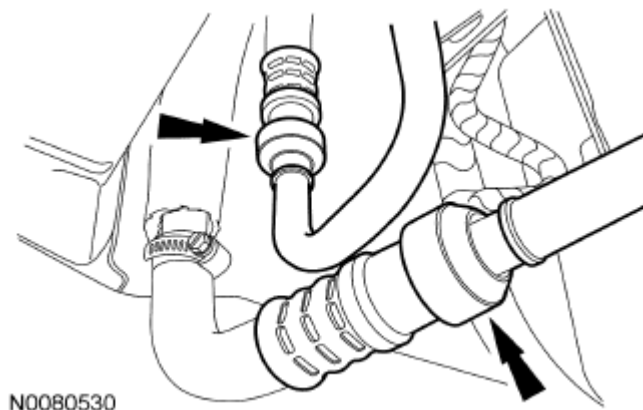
Locating Transaxle Fluid Cooler Tubes
